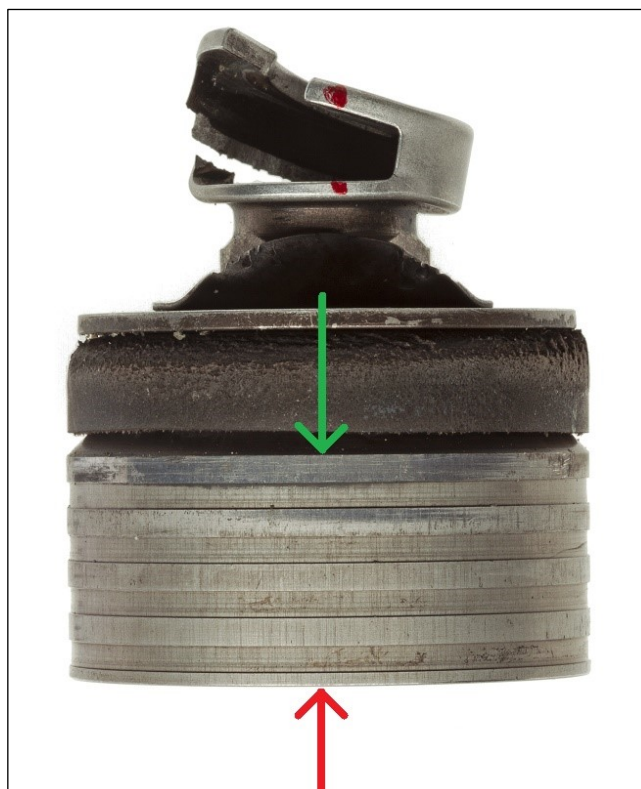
Abrasions in the pump cylinder from the carburettor for the right engine.
